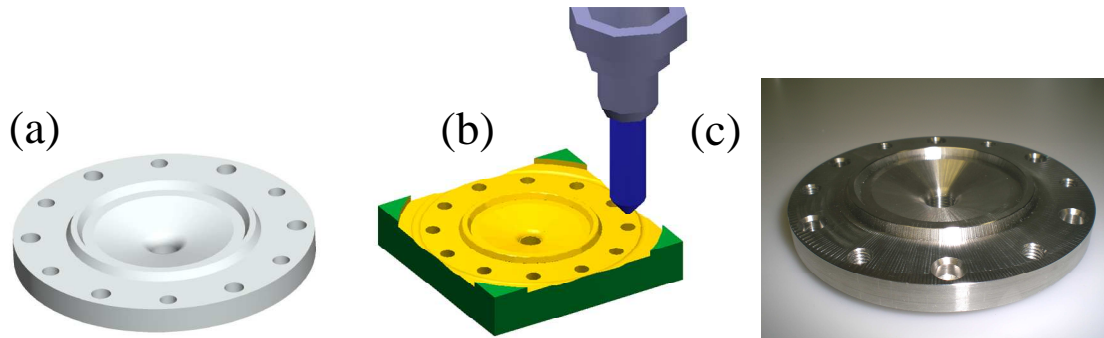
Steps taken to complete top die-ring: (a) 3D model; (b) CNC virtual machining operation; and (c) machining of part in the actual material.
